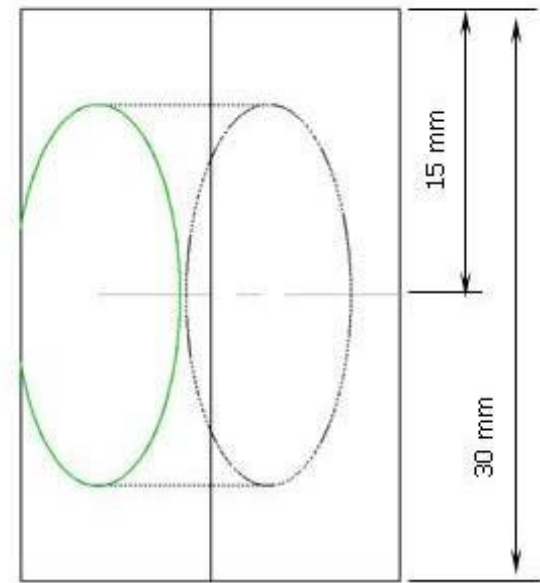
Technical Drawing of 70° Plexiglas wedge
